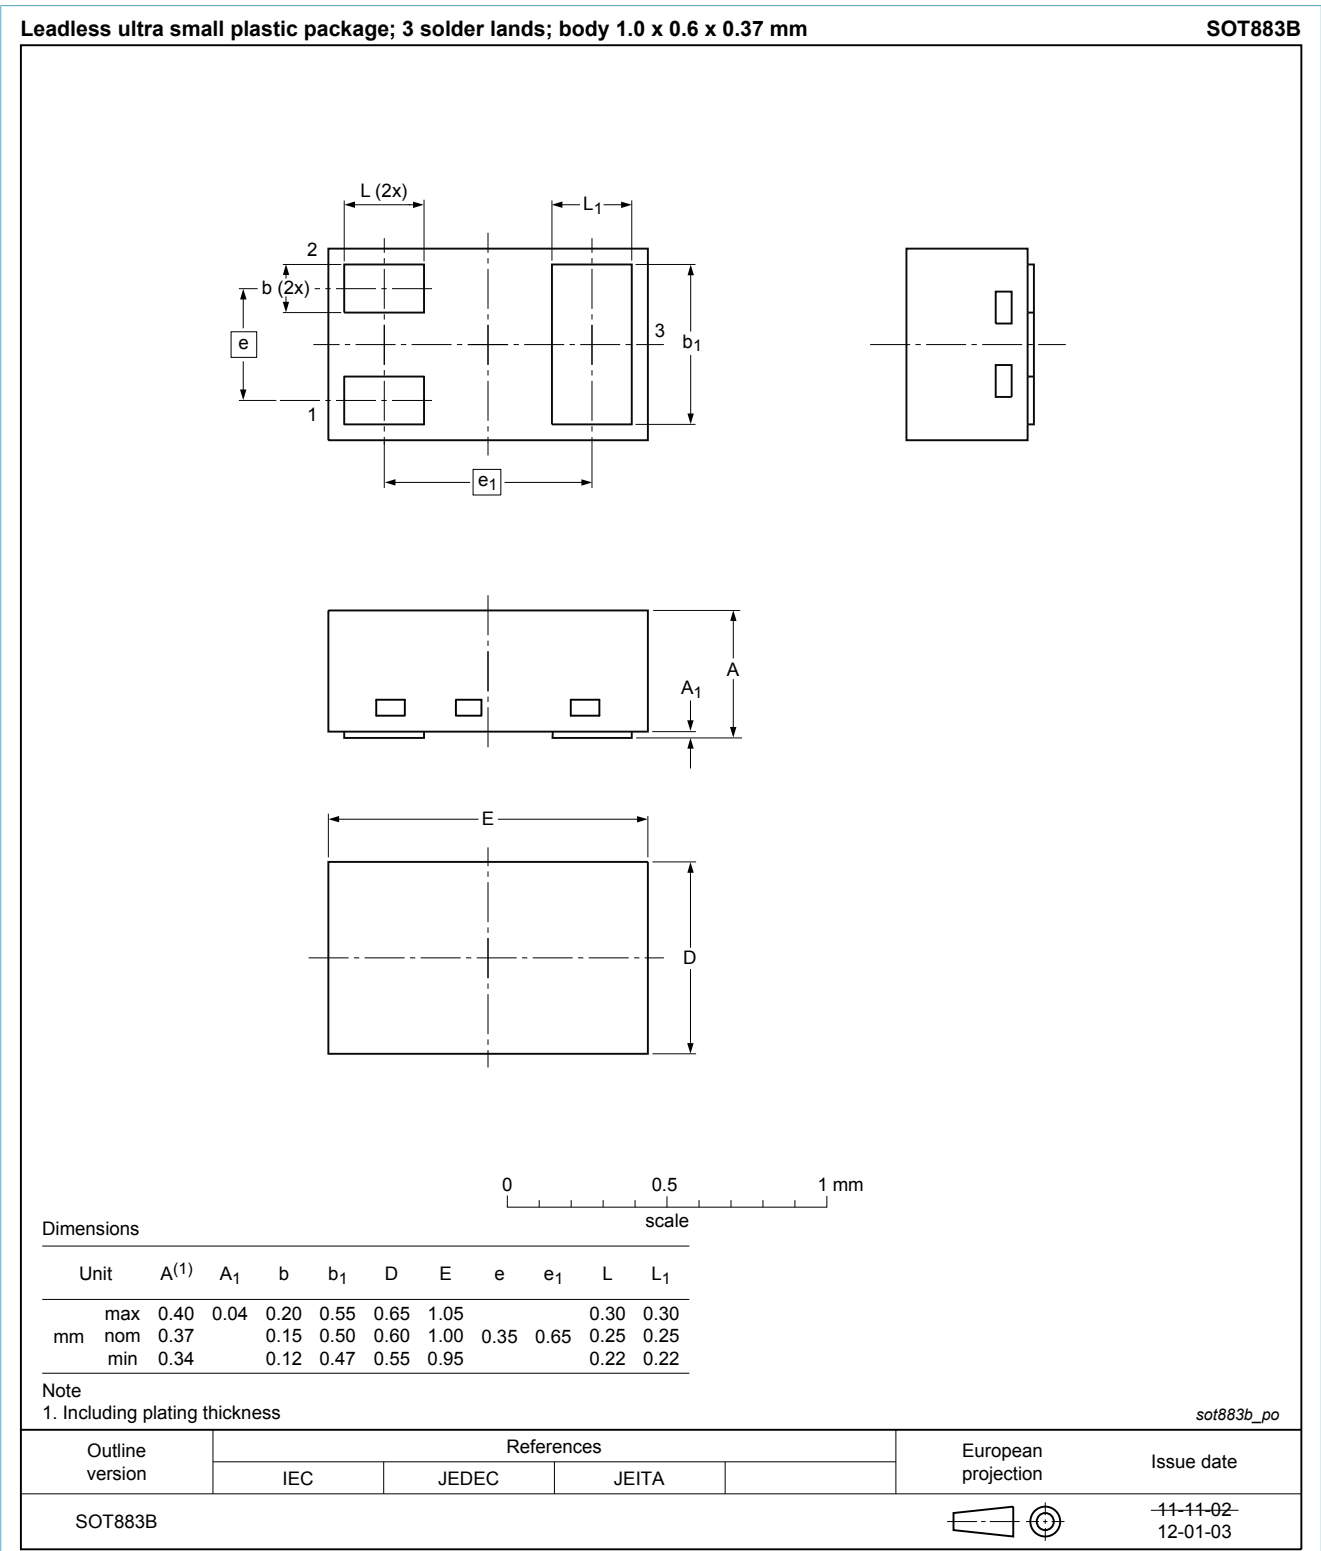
Package outline DFN1006B-3 (SOT883B)
